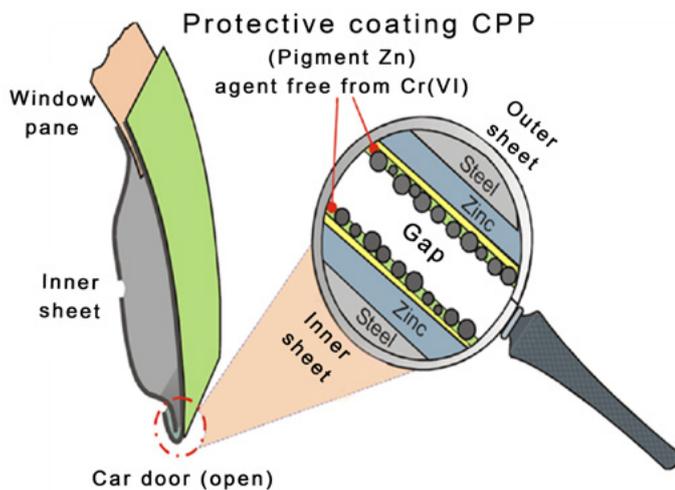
Arrangement of sheets with protective coating in car door [10]
